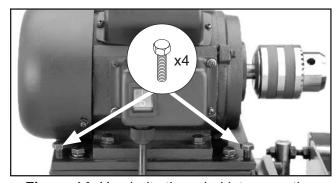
Hex bolts threaded into mounting plate (only one side shown).
